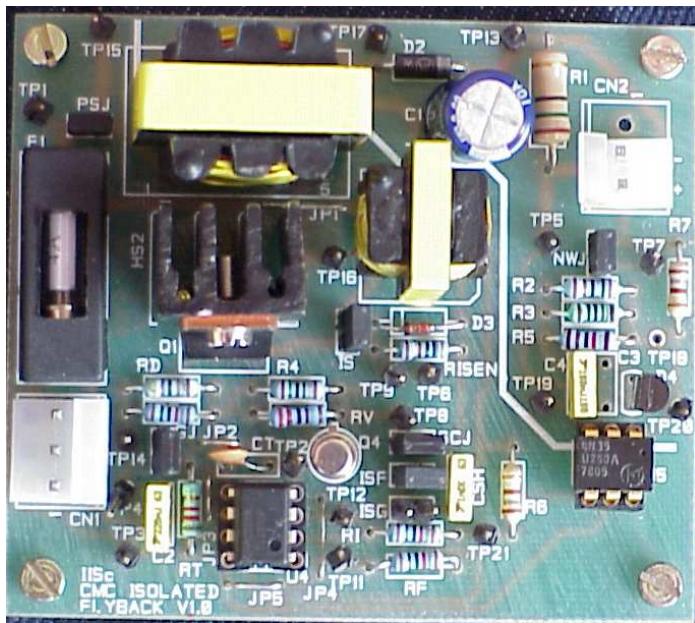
Mounted PCB Board of the Isolated Flyback Converter
